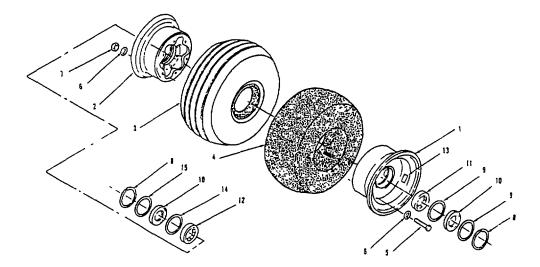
Wheel Assembly for Model 1730-EG-100
